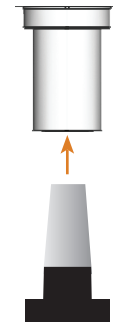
CLEANING THE INNER CONE OF THE SPINDLE
